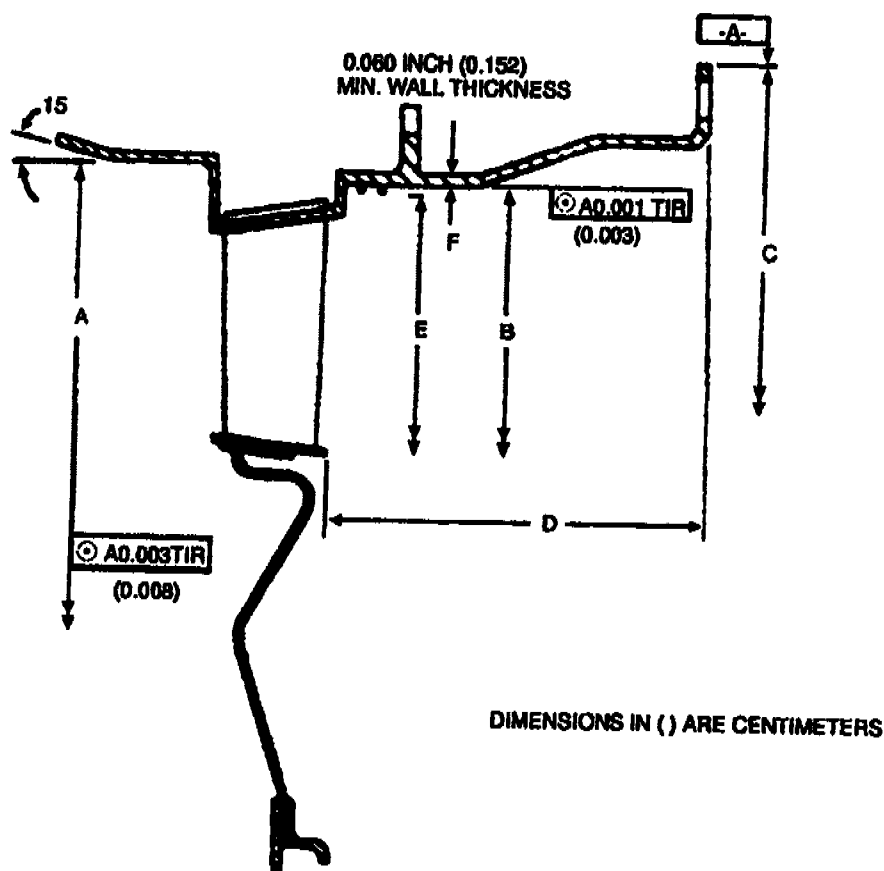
First Stage Power Turbine Nozzle Assembly Inspection Locations.
